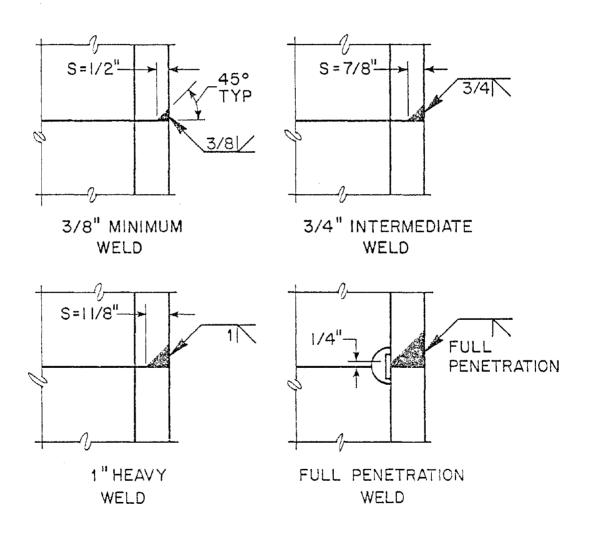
TYPICAL SPLICE WELD DETAILS
